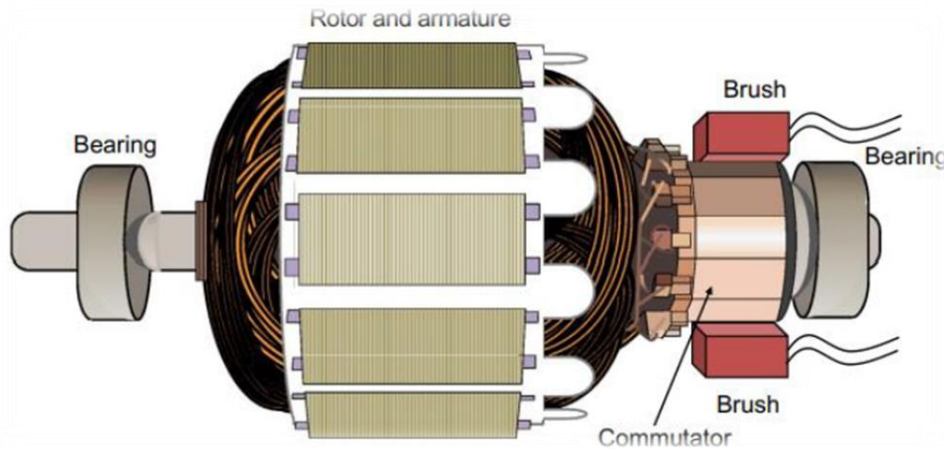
The components of a brushed DC motor include the rotor, distributed windings, commutator, brushes, and stator.
